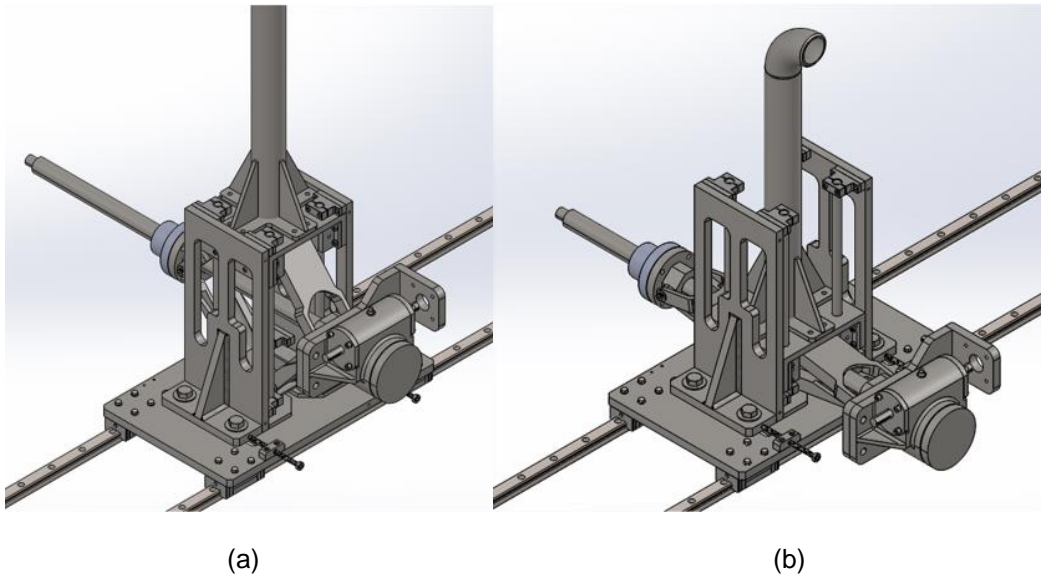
Early platform design with added screw jack and reduced scissor jack dimensions at the (a) raised and (b) lowered positions.
